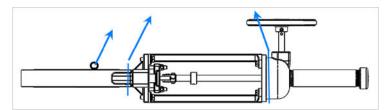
Knife Gate Valve with Bevel Gear Actuator, Horizontal Lifting
